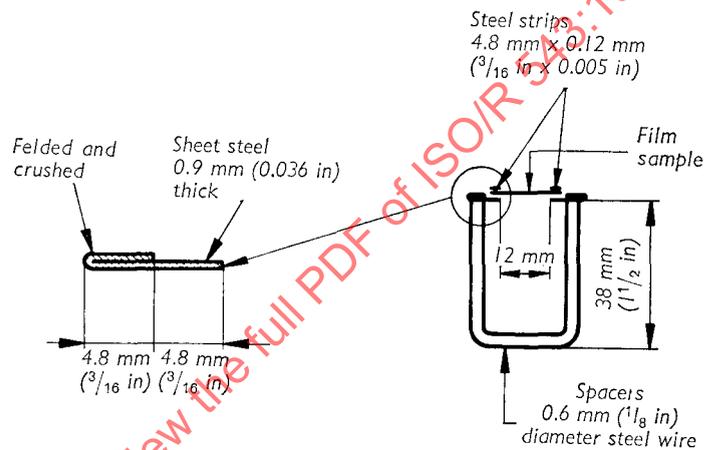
Section through supports, showing wire spacers for 16 mm film apparatus
